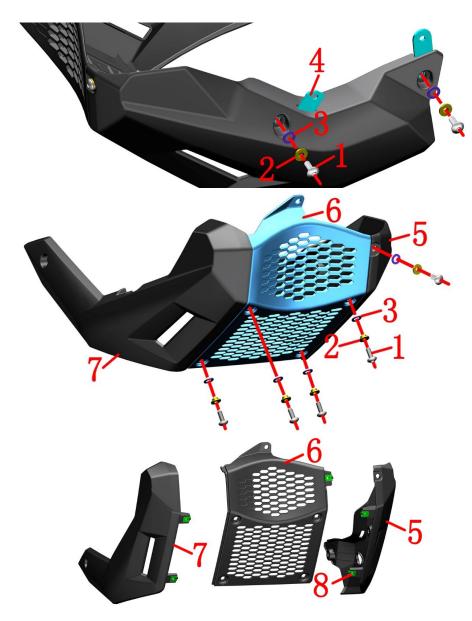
LOWER SHROUD		Lower shroud component 2	CHK
